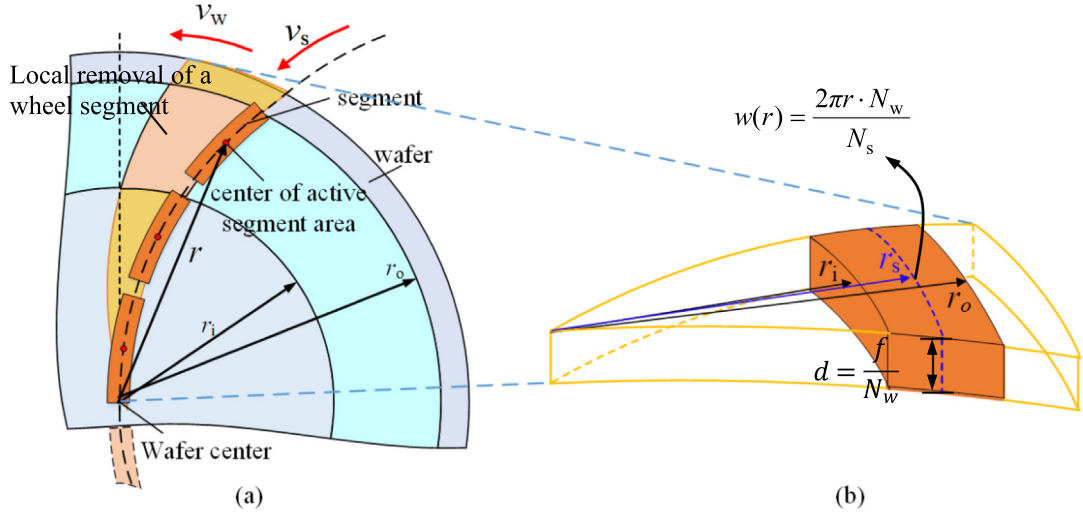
Local removal amount during one revolution of grinding wheel. (a) Schematic diagram of the local removal; (b) enlarged view of local removal.
